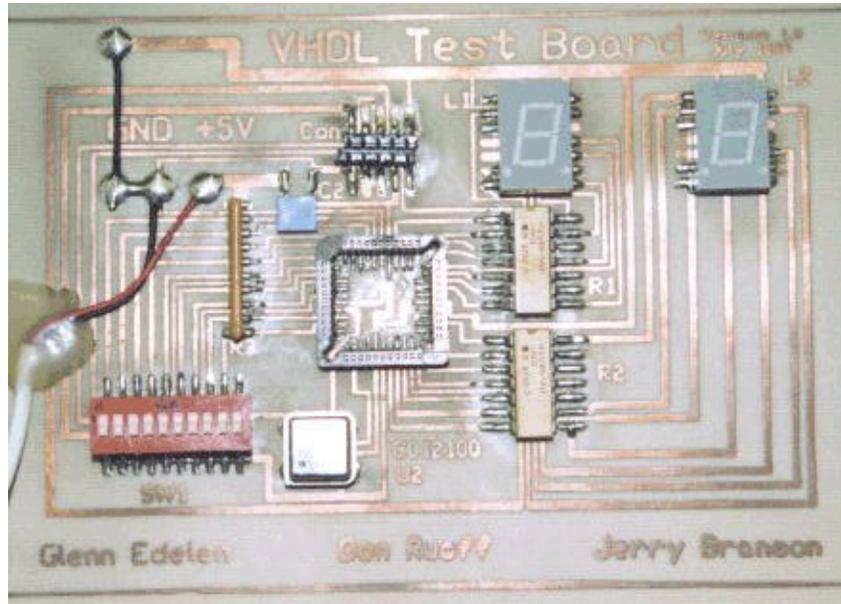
Picture of the final ALU test board without the CPLD in the socket.
